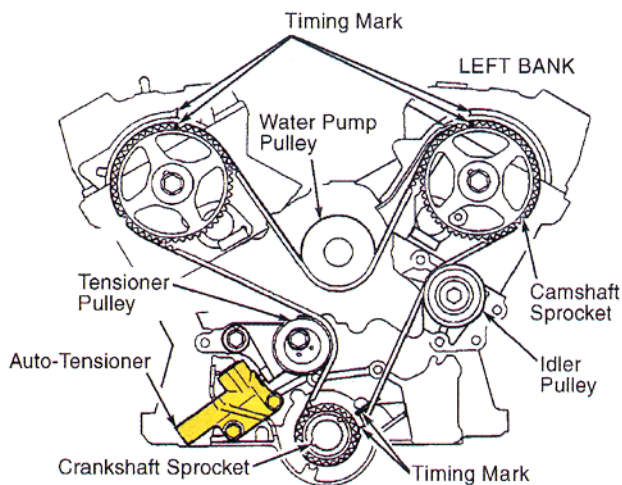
The new auto tensioner was installed on the front lower right-hand side of the block. Courtesy of Mitsubishi Motor Sales of America
